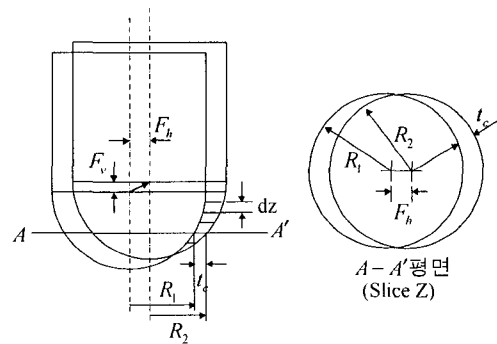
Radial chip thickness and feed for 3-axis tool path
